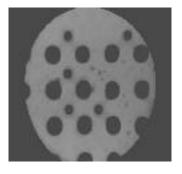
X-ray Micrograph of a Mounted PBGA Showing Solder Splattering/Balling
